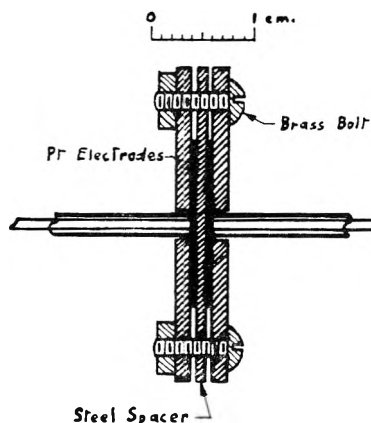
Detail of electrodes and electrode spacer assembly.
